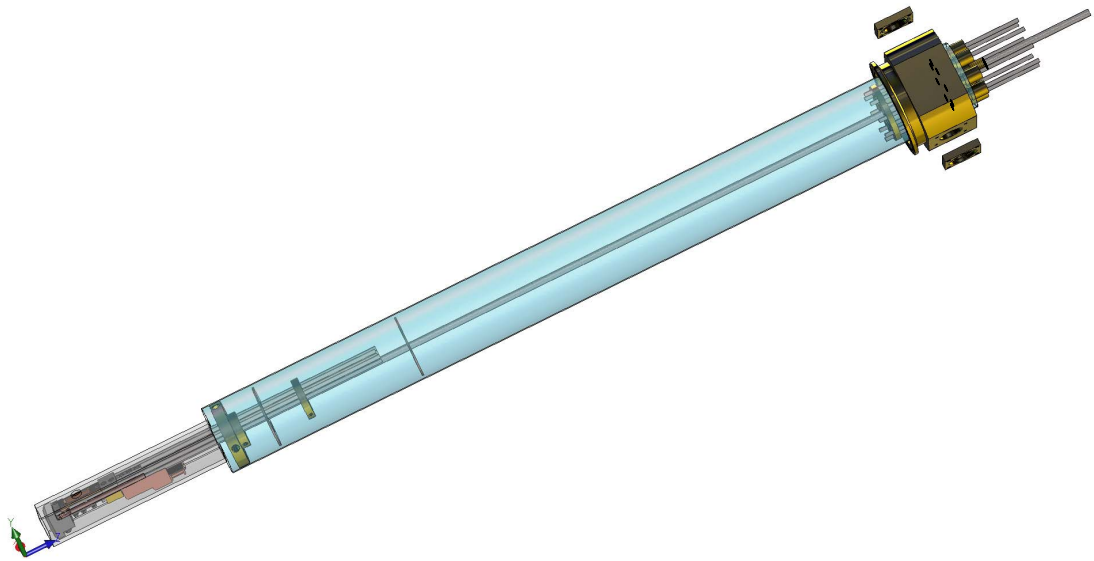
3D CAD rendering of the assembled Octopus machine components.
